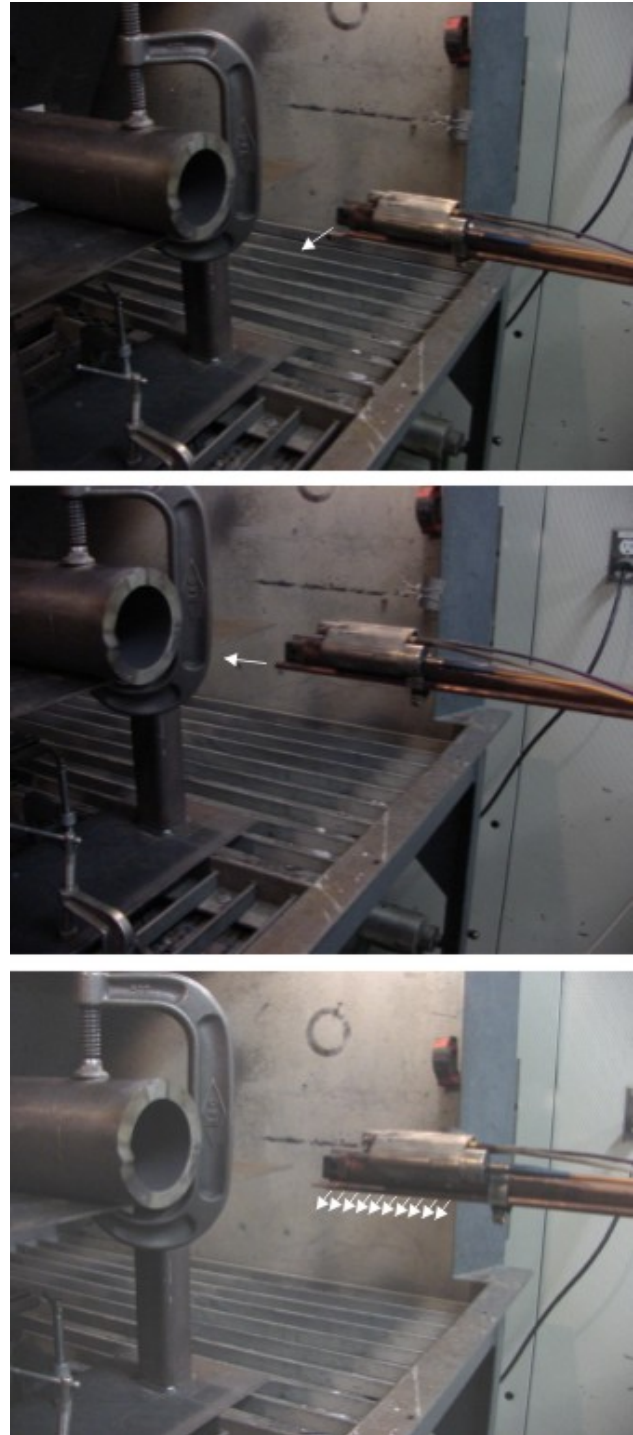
Sparging gas arrangements for ID plasma spray. Top – side on; middle – end on; bottom – line.
